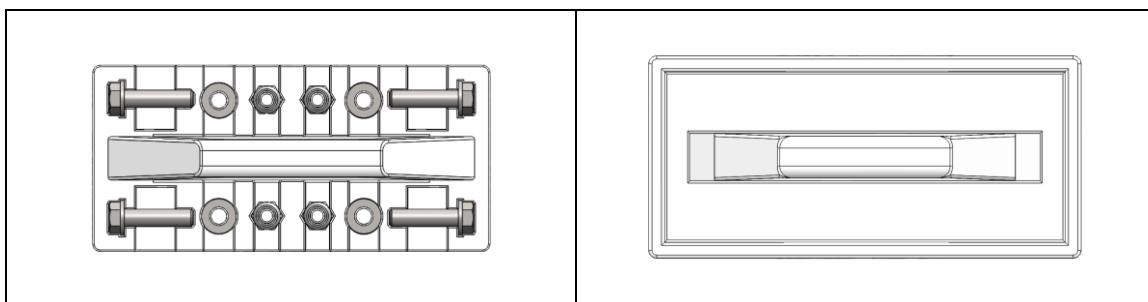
Top view (left) and bottom view (right) of the mitre box hardware fixture [70].
